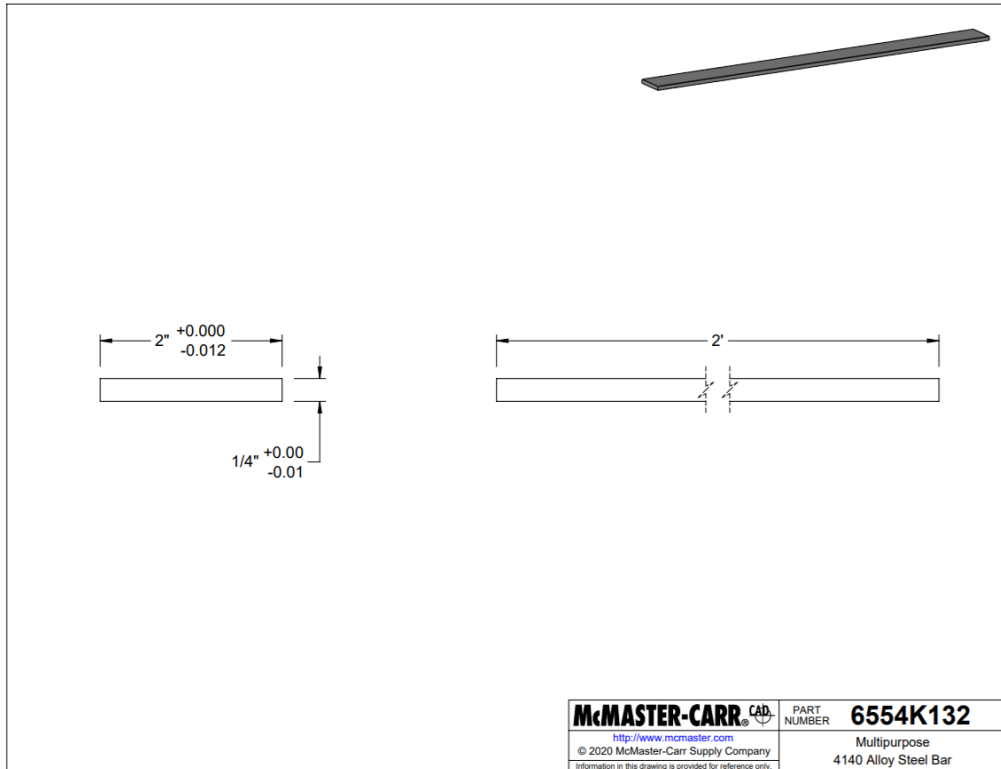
Drawing of Support Piece Used for Each Section of Ladder Provided by McMaster-Carr
